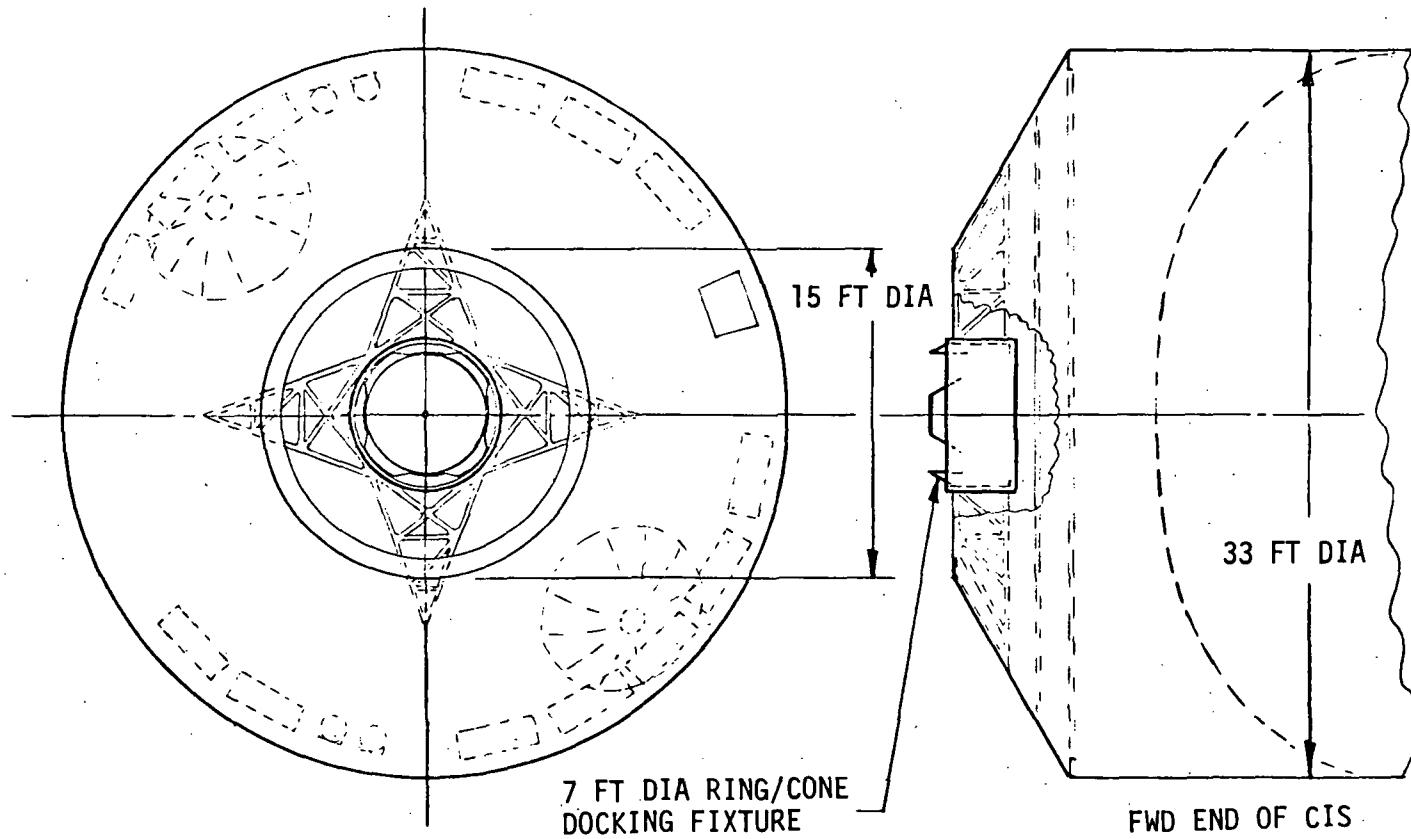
CIS with Ring/Cone Docking Fixture
